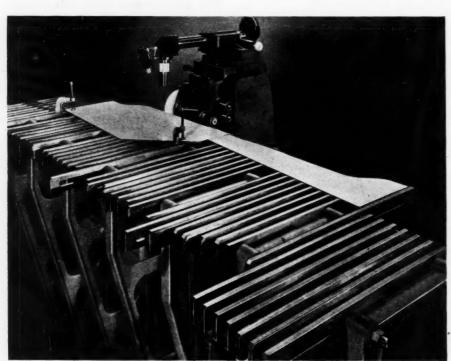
Rear View of Templet Grinder, Showing Work Mounted on Adjustable Parallel Supports
